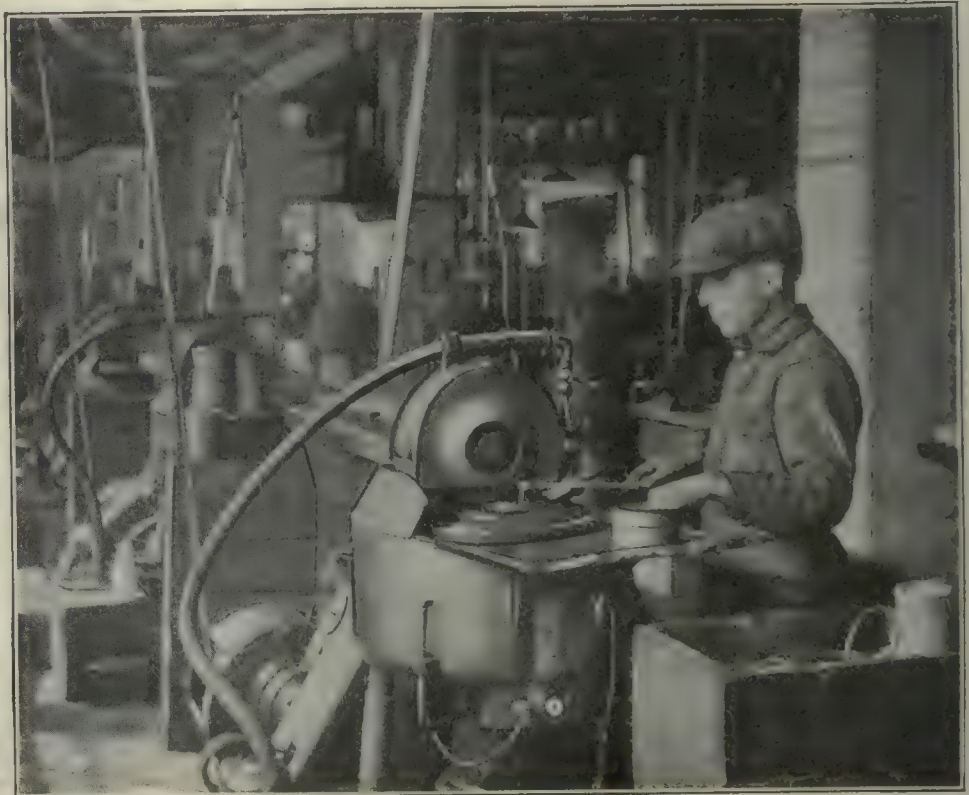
SIDE GRINDING ON HEALD GRINDING MACHINES
